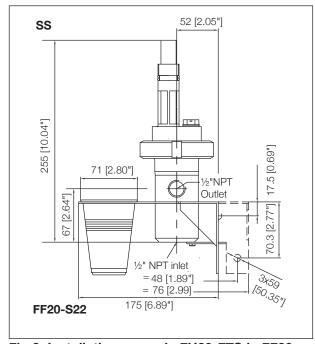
Installation example FU20-FTS in FF20-flow fitting SS
